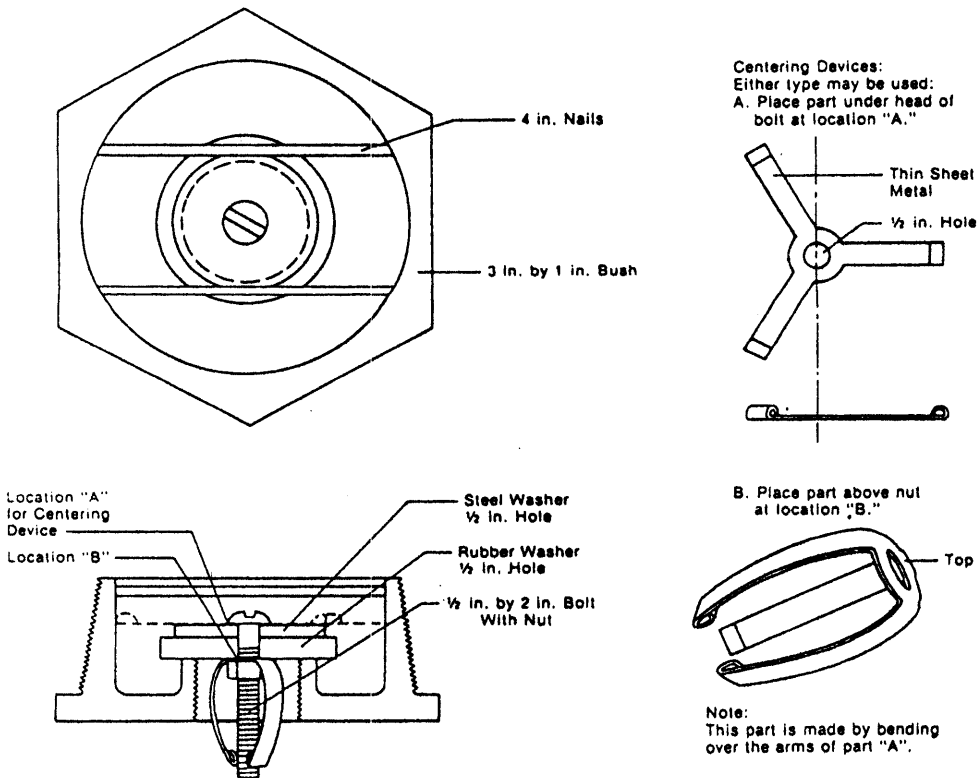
Check valve for hydraulic ram. (The purpose of the centering device—see detail on the right—is to prevent the moving assembly from slipping off-center or to the side.)
